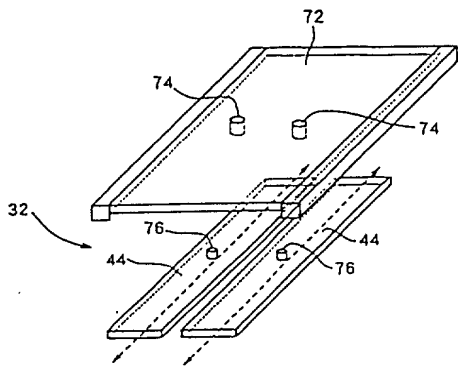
is a perspective view of a mechanical assembly 32. The assembly includes a rectangular frame 72 with side rails 74. Two parallel elongated members 44 are positioned below the frame. Each member 44 has a central opening 76. The members 44 are connected to the frame 72 by two small cylindrical components 74. Dashed lines indicate the alignment and movement of the members 44 relative to the frame 72.
